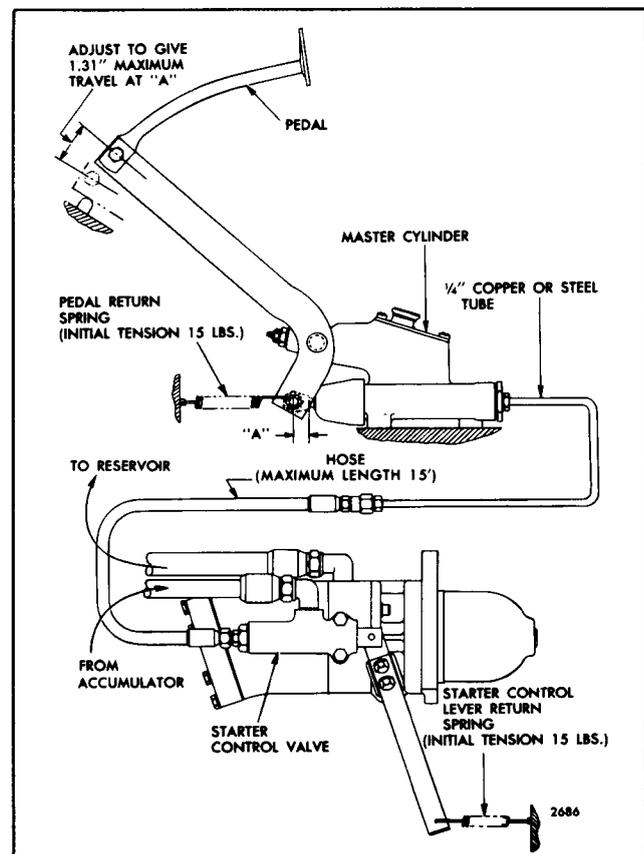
Hydraulic Remote Control System for Hydrostarter
